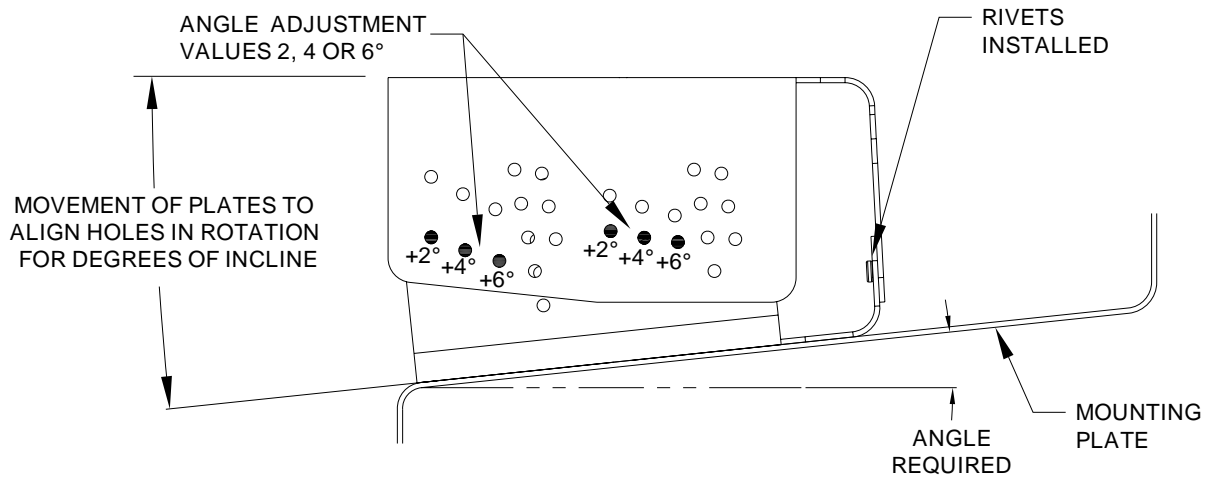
GMU 44 Universal Mount Hole Alignment, Rotational Method (Bottom Plate Mounted)
